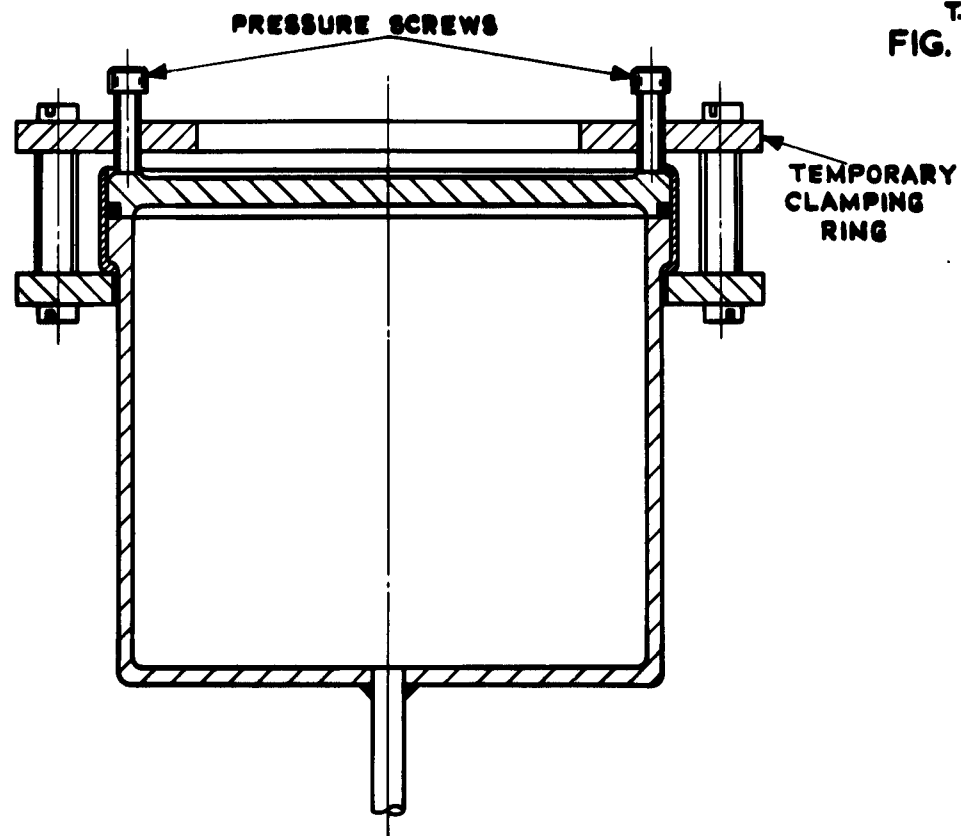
SECTION OF TWO-STAGE SEAL WITH CLAMPING RING.
